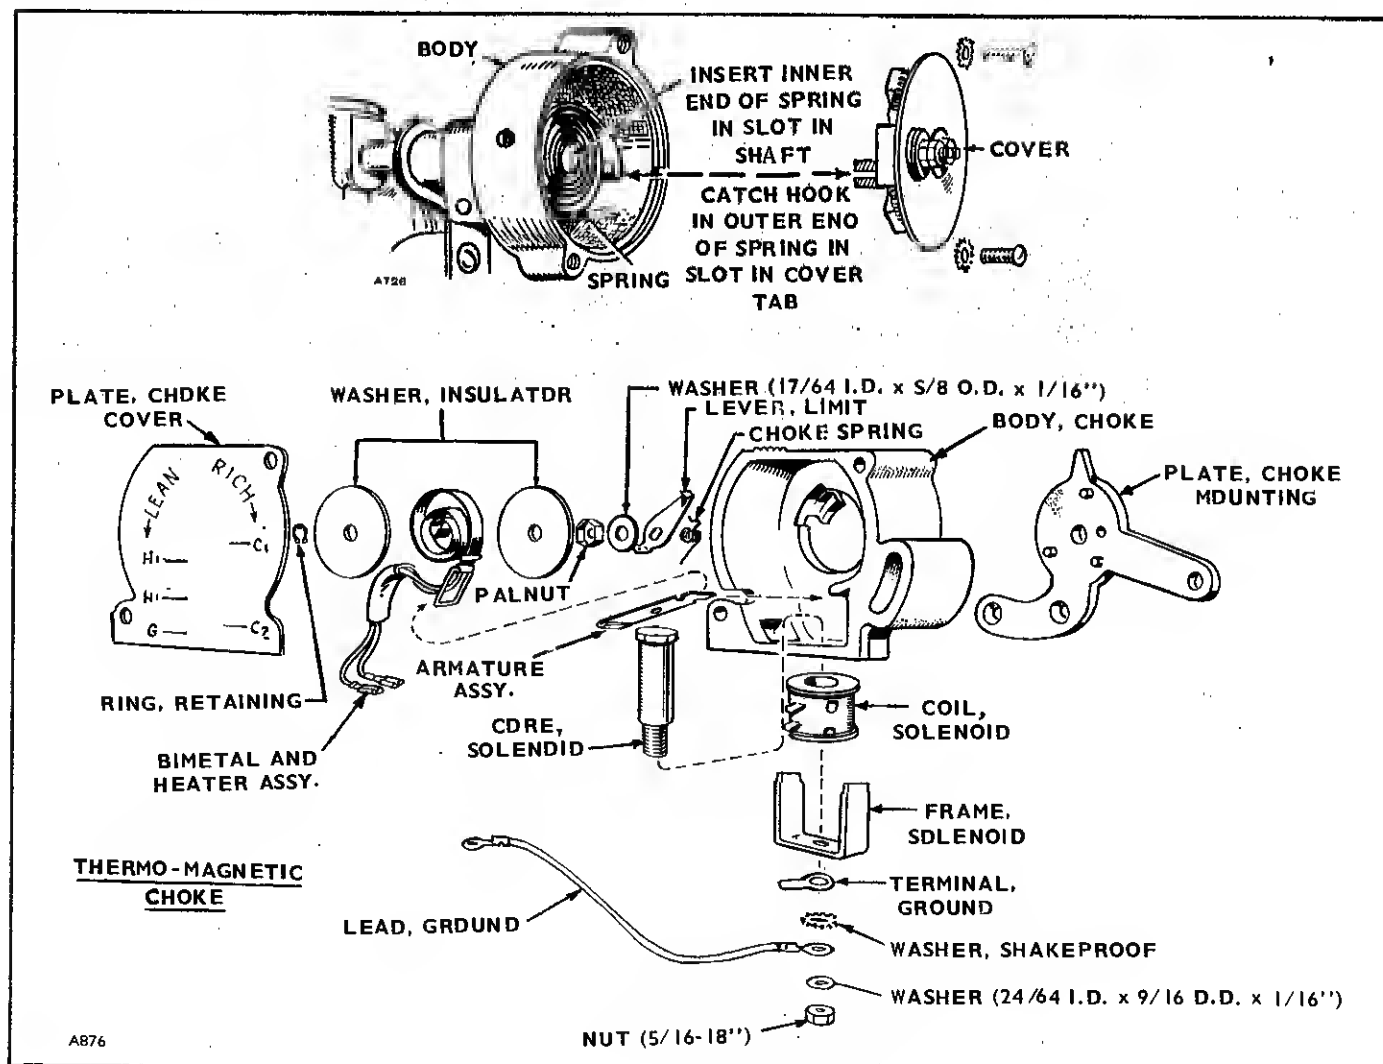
EXPLODED VIEW: ELECTRIC CHOKING
